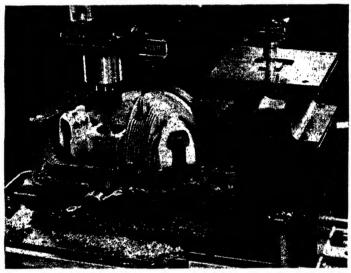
Surfacing a flange seat on an airplane engine cylinder. The guide plate and follower are at the right.
